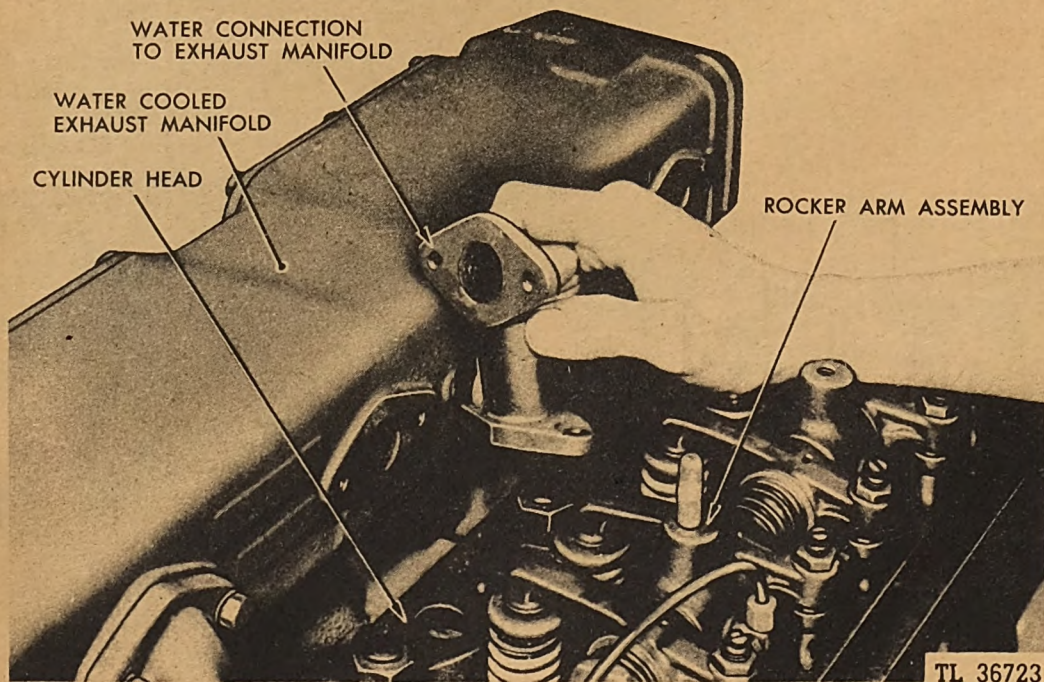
Cylinder Head to Exhaust Manifold Water Connection
